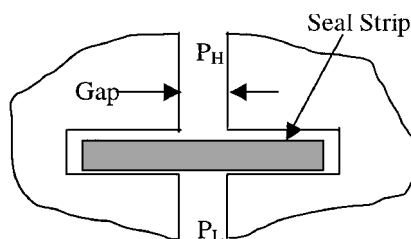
Typical nozzle-shroud intersegment sealing arrangement.
